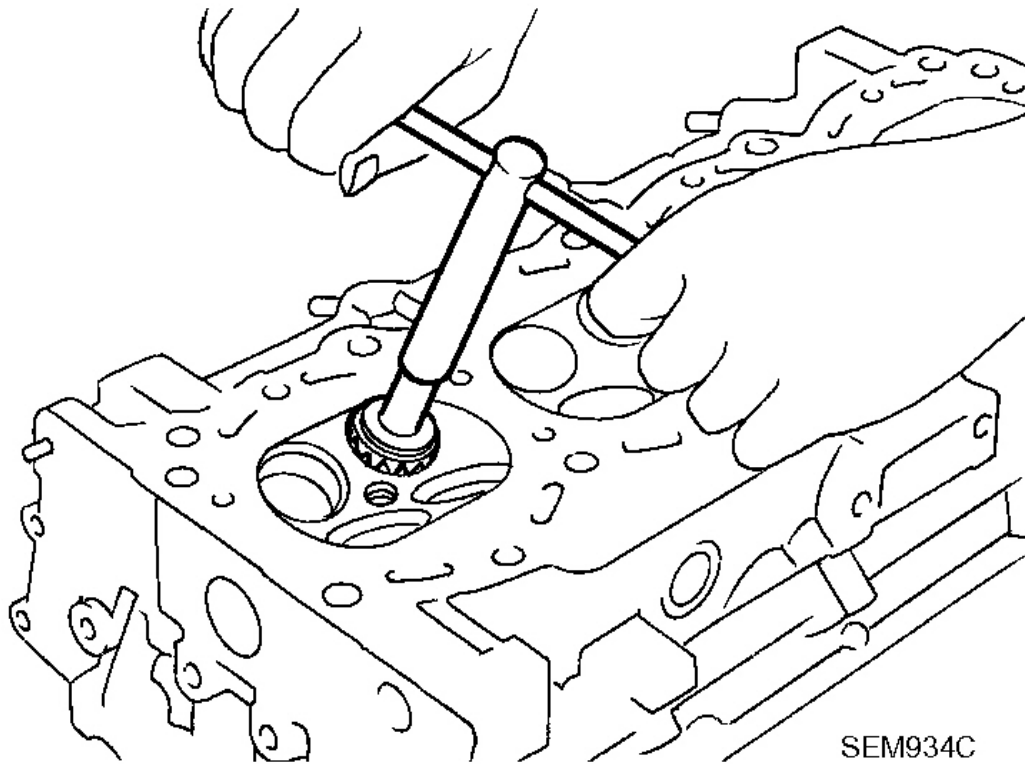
Pressing Contacting Surface To Cut In Single Drive By Using Valve Seat Cutter
